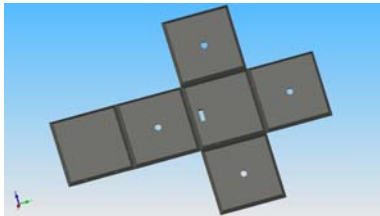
Rendered CAD-drawing of machined African I-BLOCK shell
